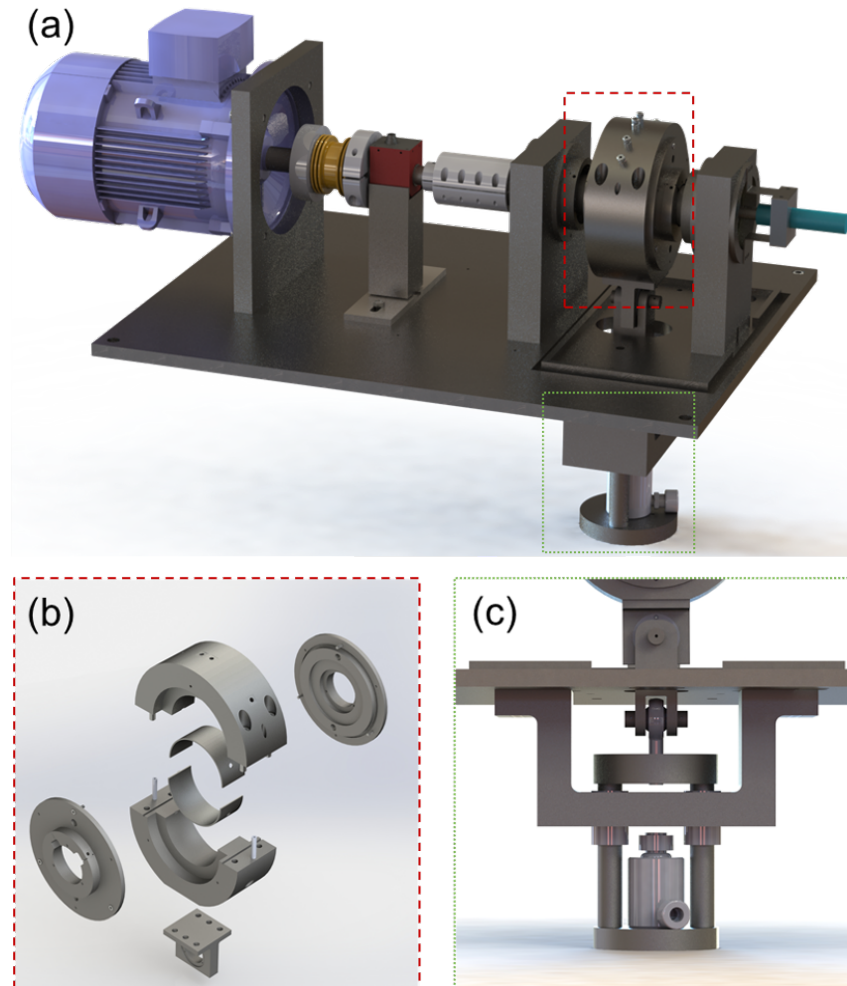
CAD renders of BAXTER test rig. a) Dimetric projection of full assembly. b) Exploded view of bearing assembly. c) Side view of loading system.
